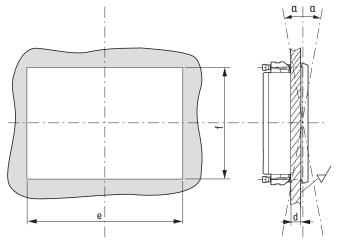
Dimensions in mm (inches); tolerance: ±0.2 mm
